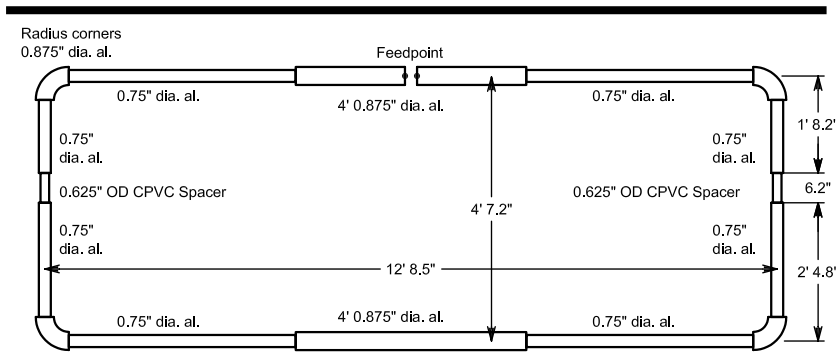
General outline of the 10-meter aluminum Moxon rectangle, showing tubing dimensions.
